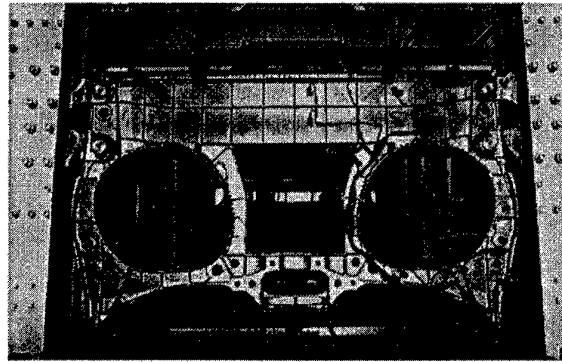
F/A-18 Wing Attach Bulkhead Mounted in Fatigue Test Frame.
